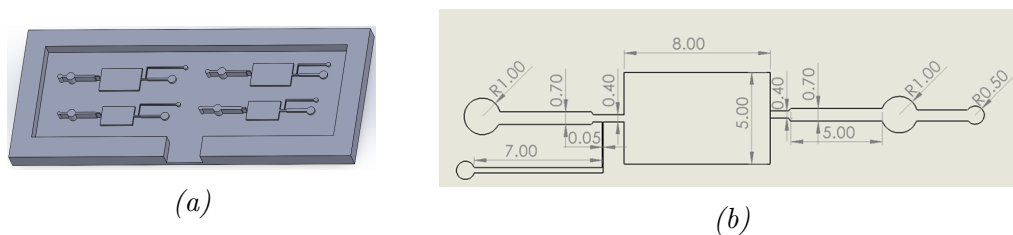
The design of the further improved microdispenser in Solidworks (a) and the technical drawing (b).
